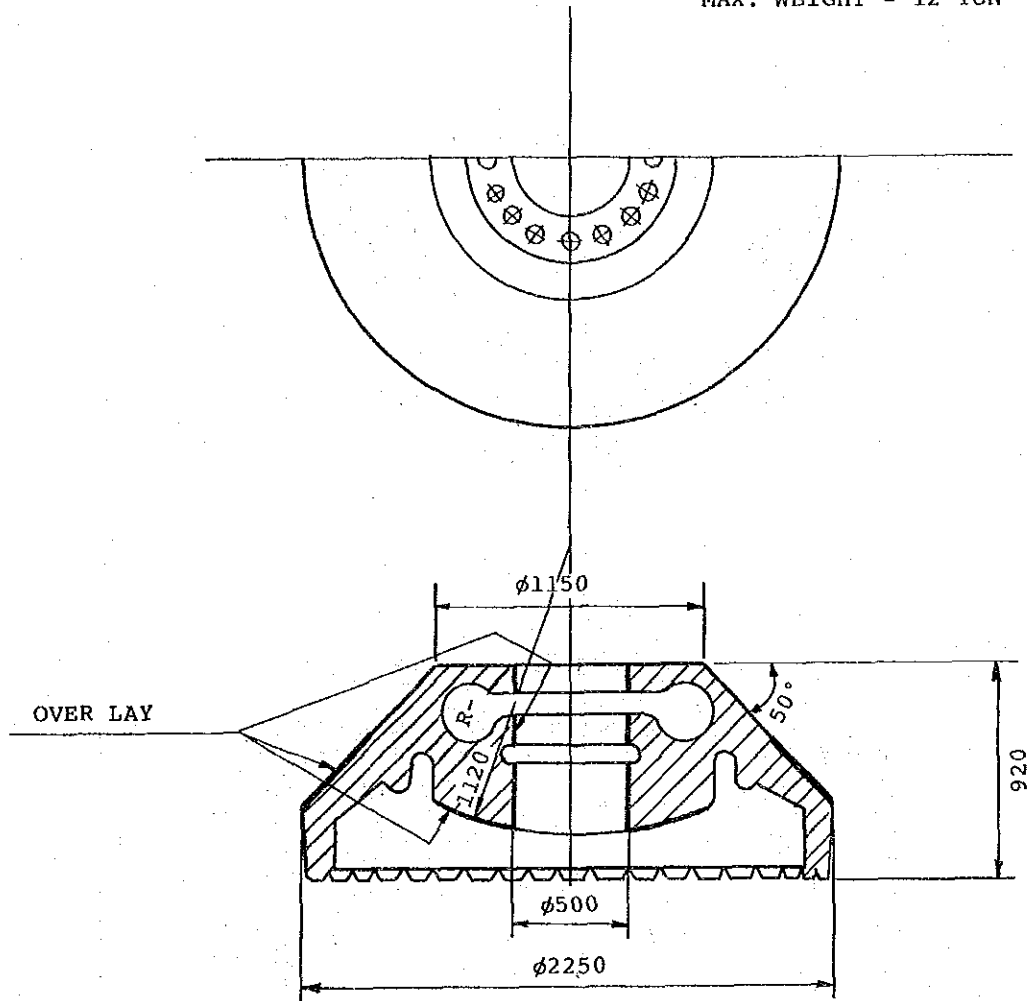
(1/5) Representative part requiring overlay welding—Head
